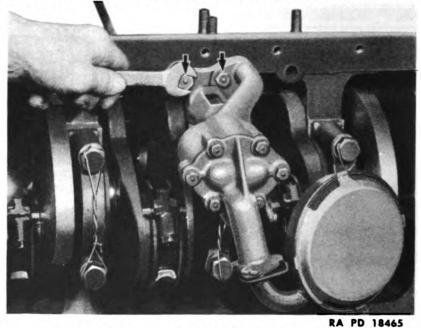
Oil Pump Retaining Cap Screws - Removal
